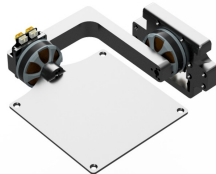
Mechanical assembly overview showing the integration of stabilized platform and motor mounts
